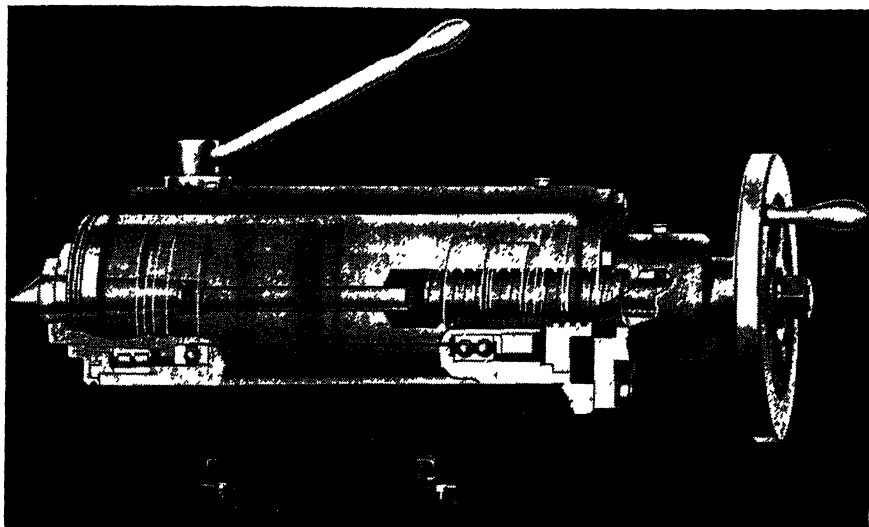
Lathe Tailstock with Ball and Roller Bearings—Higher Pairing.
